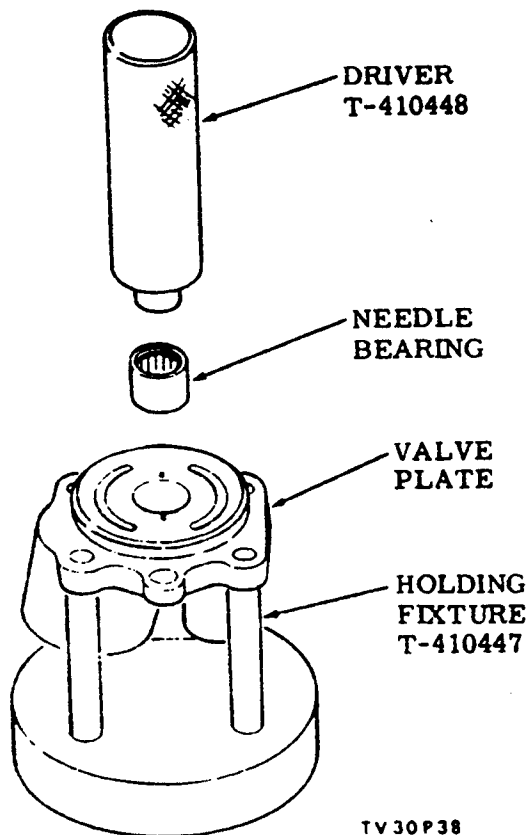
Assembly of Needle Bearing in Valve Plate
